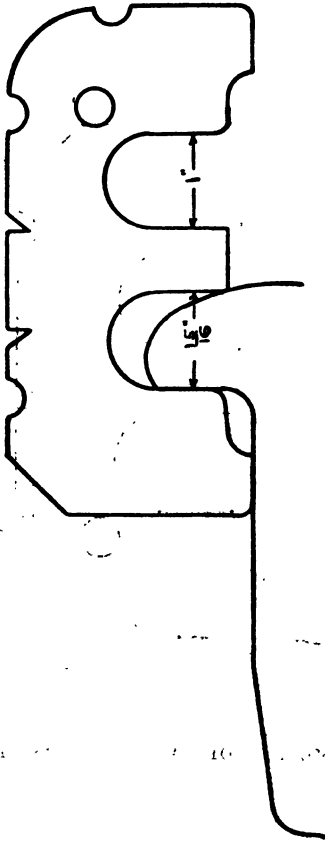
METHOD OF GAUGING WORN FLANGES.
